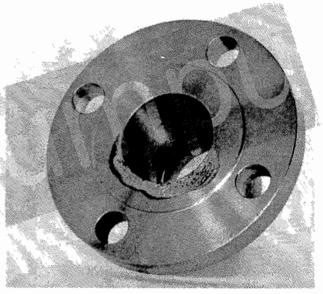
3. Crevice corrosion under the sealing on a flange exposed to chlorinated seawater.
